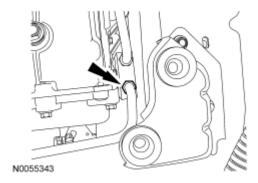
Identifying Transmission Fluid Cooler Tube Fitting From Thermal Bypass Valve Courtesy of FORD MOTOR CO.
